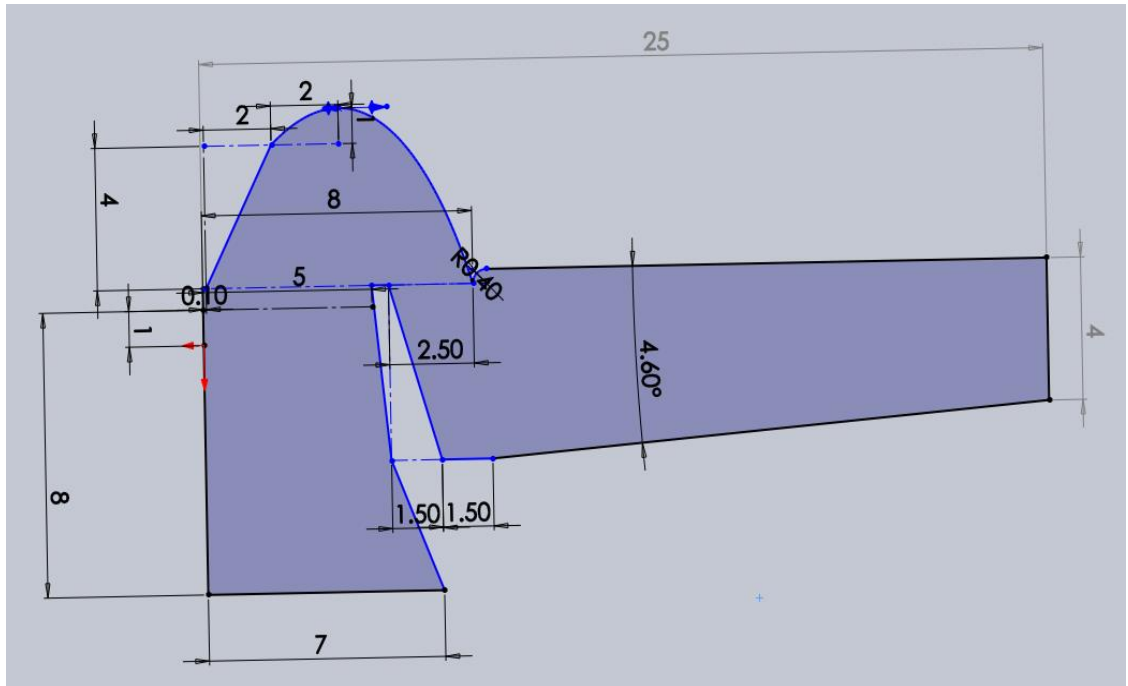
Two dimensional CAD drawing of the mill. Dimensions given in mm.
